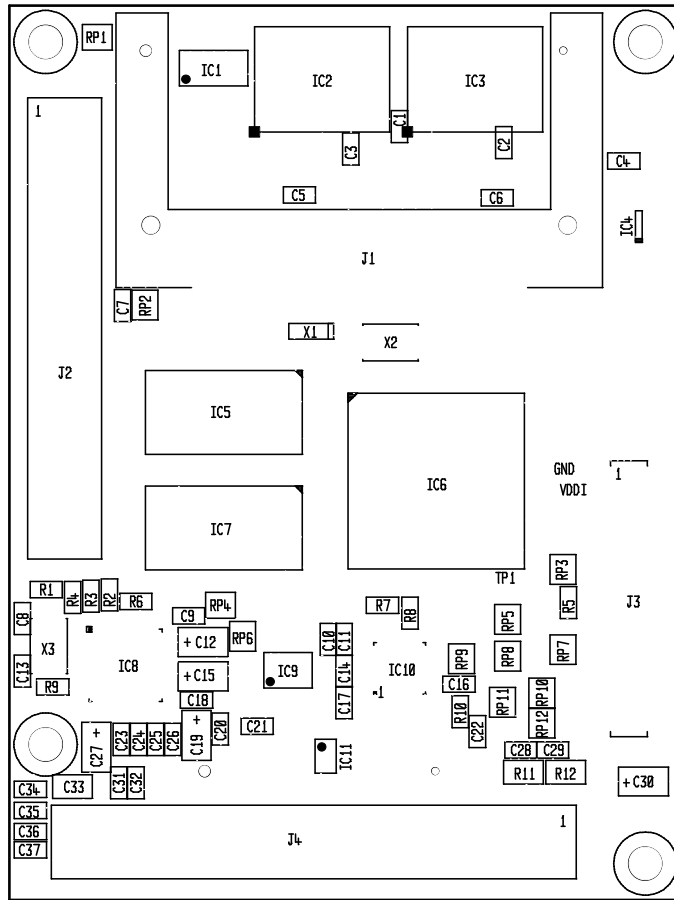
AA1100 COMPONENT PLACEMENT – TOP SIDE
